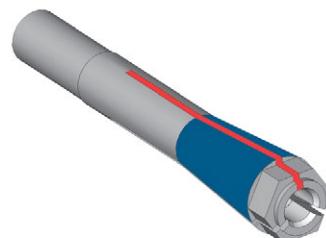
GREASING THE COLLET CHUCK; SURFACE IN WHICH GREASE IS TO BE APPLIED IS MARKED IN BLUE; SLOT THAT MAY NOT BE GREASED IS MARKED IN RED
